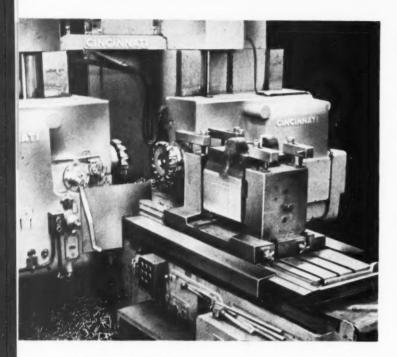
Motors of 50-H.P. rating drive each spindle of the straddle-milling machine for removing chips at rates up to 20 pounds per minute.
